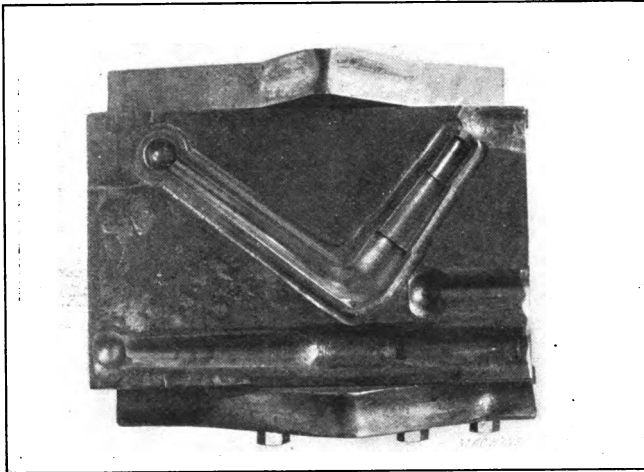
Drop Forging Die and Bending Die for Steering Gear Part
